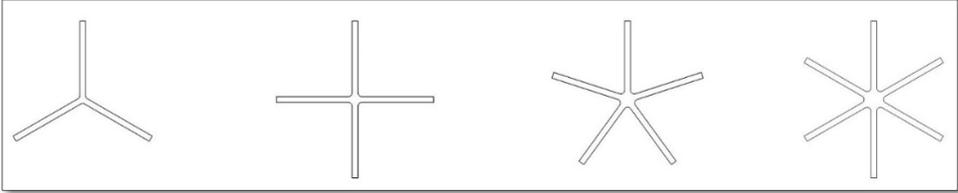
Flow straightener cross sections showing styles with 3, 4, 5, and 6 divisions.
